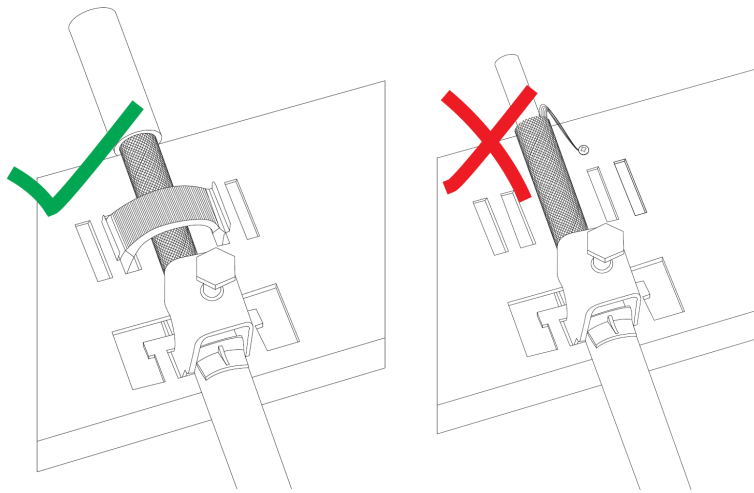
Correct (left side) and wrong (right side) connection of VFD cable; correct 360° connection of shielded cable requires cable clamps or metal fittings
